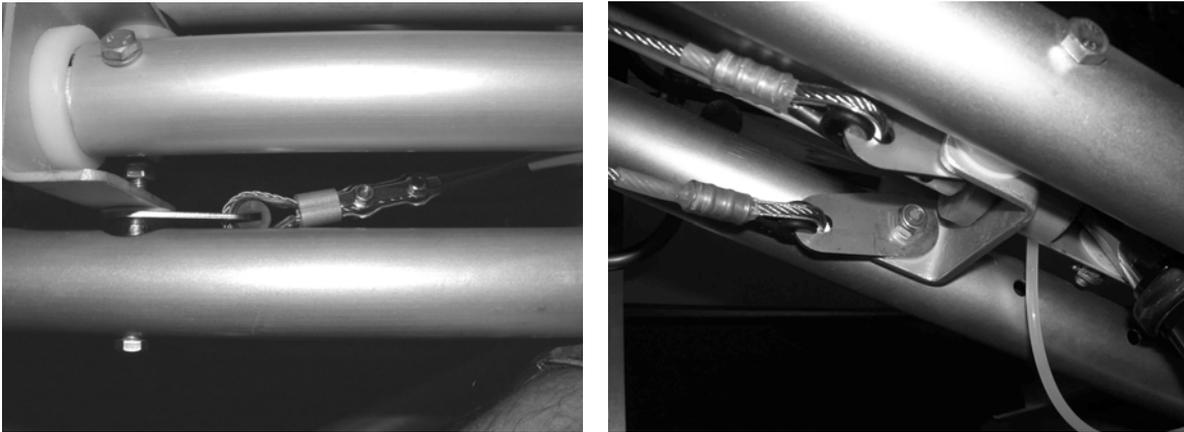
; rudder stop cables attached to rear stick pivot, standard and optional arrangements.
